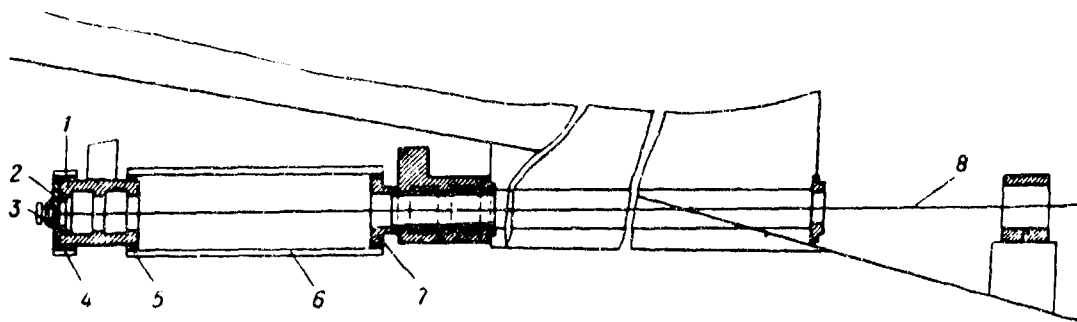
Laying Out a Shaft's Axial Line with a String in the Presence of a Shaft Bracket: 1 - packing; 2 - centering flange; 3 - propeller; 4 - sealing strap; 5 - packing; 6 - sealing jacket; 7 - flange; and 8 - string.
